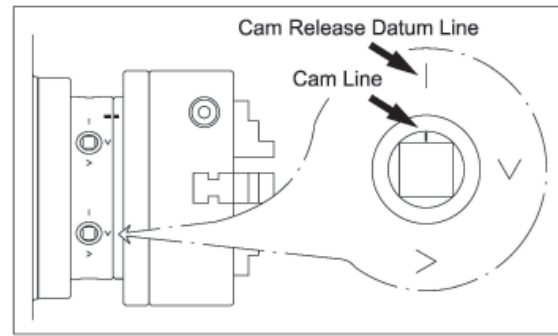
Camlock loosened with the cam line aligned with the datum line.
